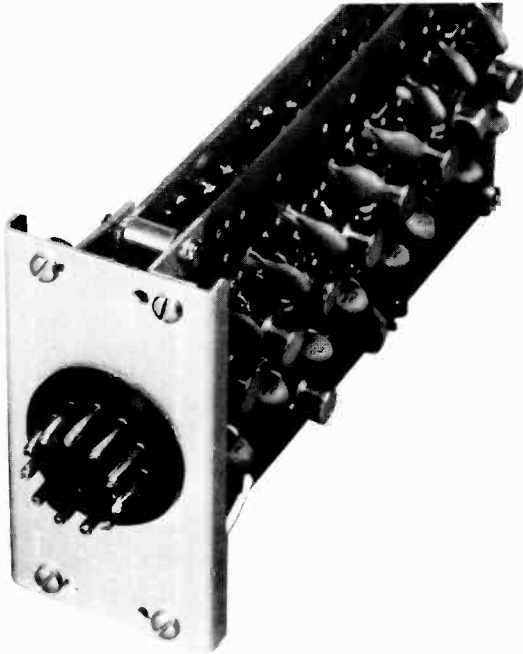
Suggested plug-in arrangement for mounting counting-circuit boards.
